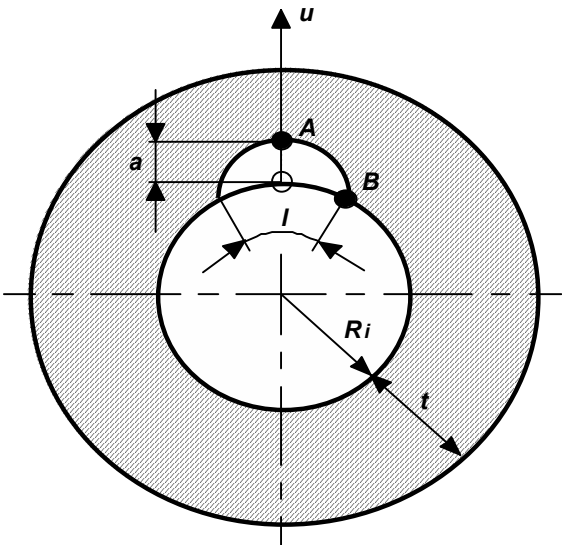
Part circumferential internal surface crack in a cylinder.
